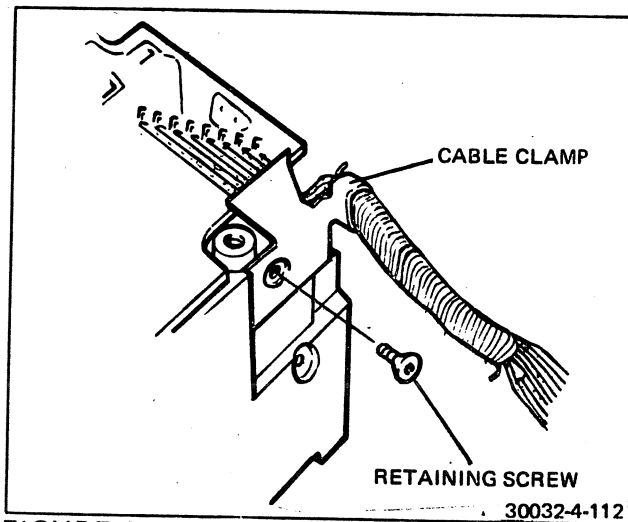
MULTI-WIRE CABLE CLAMP
